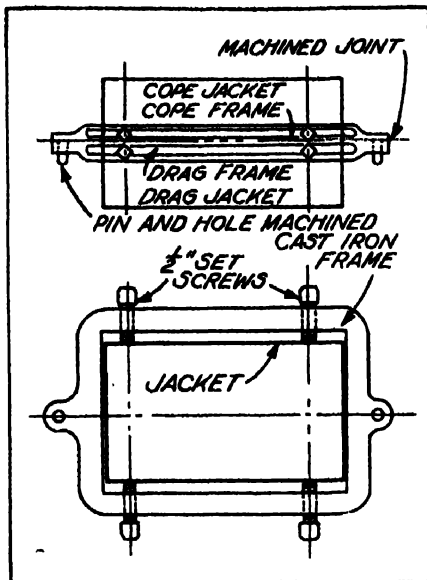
SKETCH OF FRAME FOR CENTERING MOLD JACKETS ON SQUEEZER MACHINE
